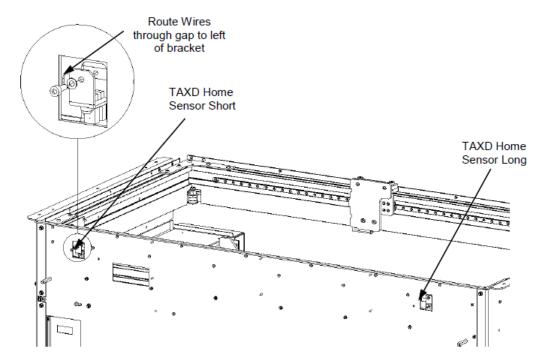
The Transport Arm X Drive Sensors (Drive removed for clarity)
